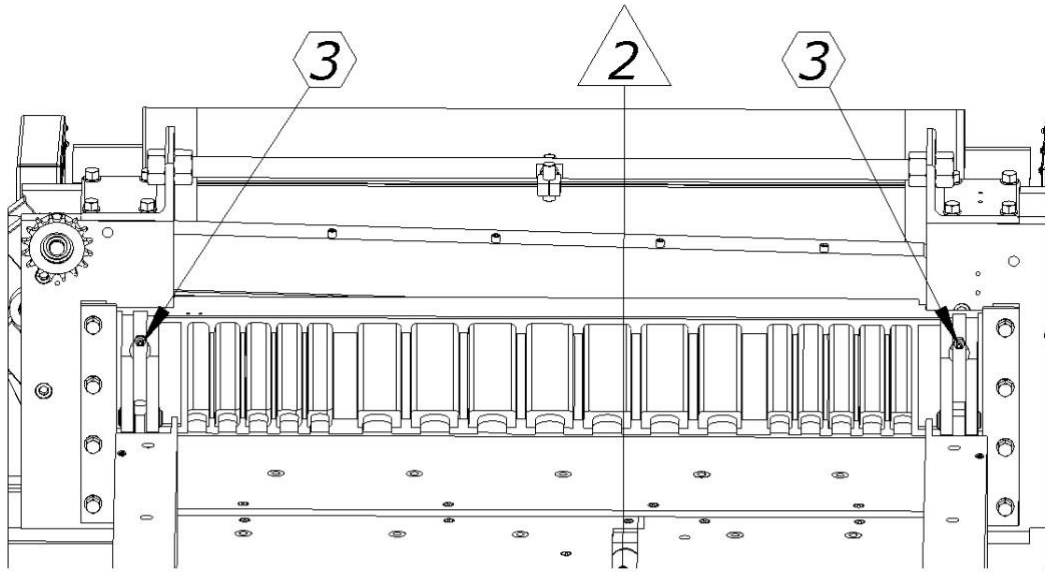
Lubrication space of the pressure beam (3), guide shaft of the backgauge mechanism (2)
